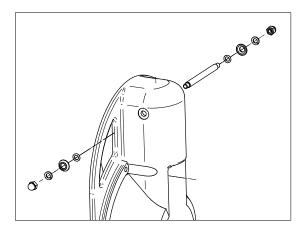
Pumps TX820:* Unscrew the domed nuts of the stopper assembly. Remove the stopper flanges, washers and o-rings. Carefully pull out the stopper rod.
